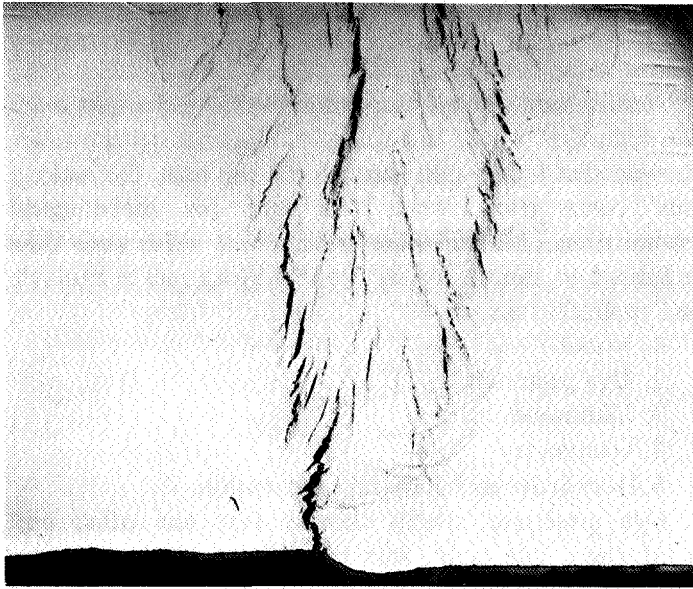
Section through cracked Inconel 182 weld, bottom header. This appeared as an isolated crack before sectioning (mag. 3x).
